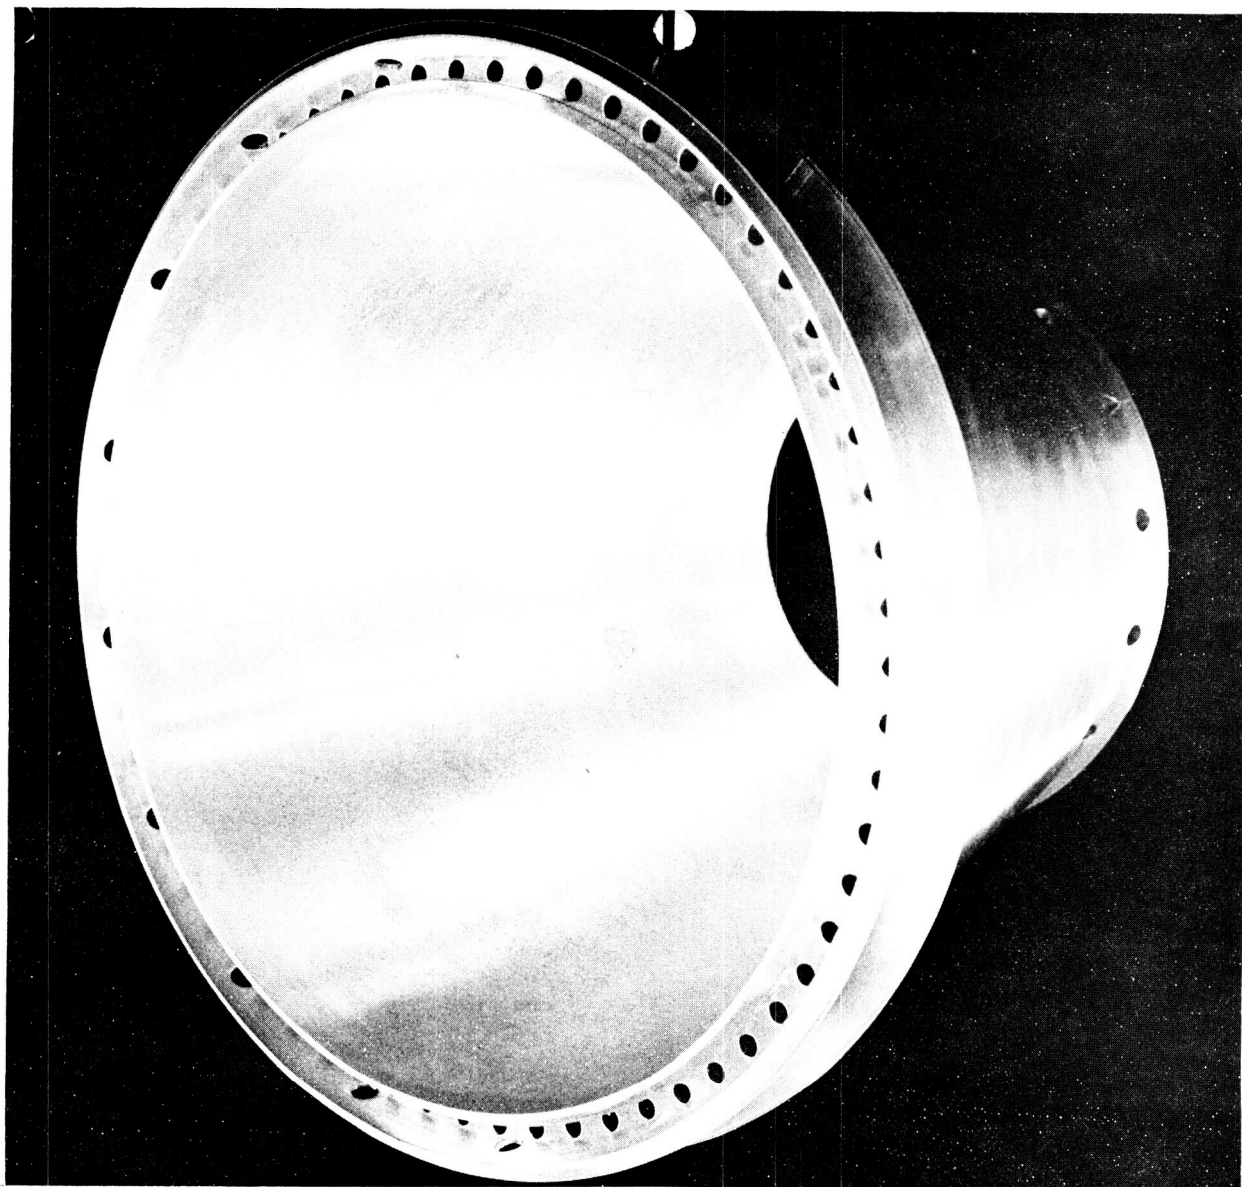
Water Cooled Aluminum Nozzle Extension-Drilled Subassembly
